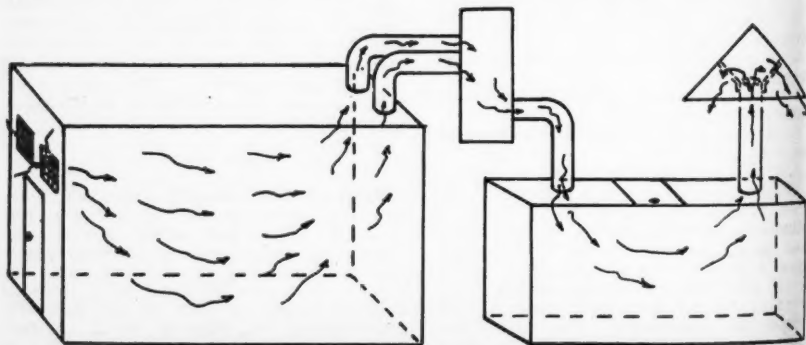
Drawing illustrating path of air from entrance into sandblast room through exhaust pipe and out through cone-hood.
